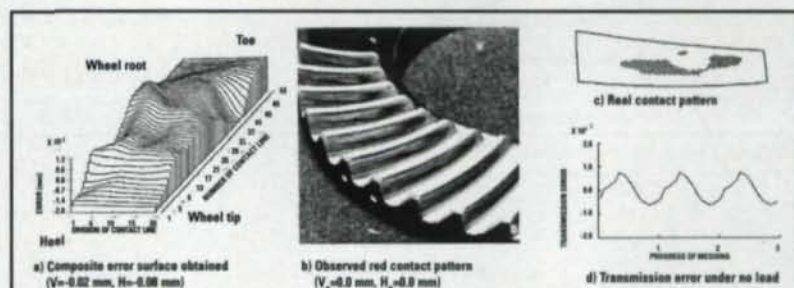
Composite error surface and red contact pattern for worn flank of troubled gears.
